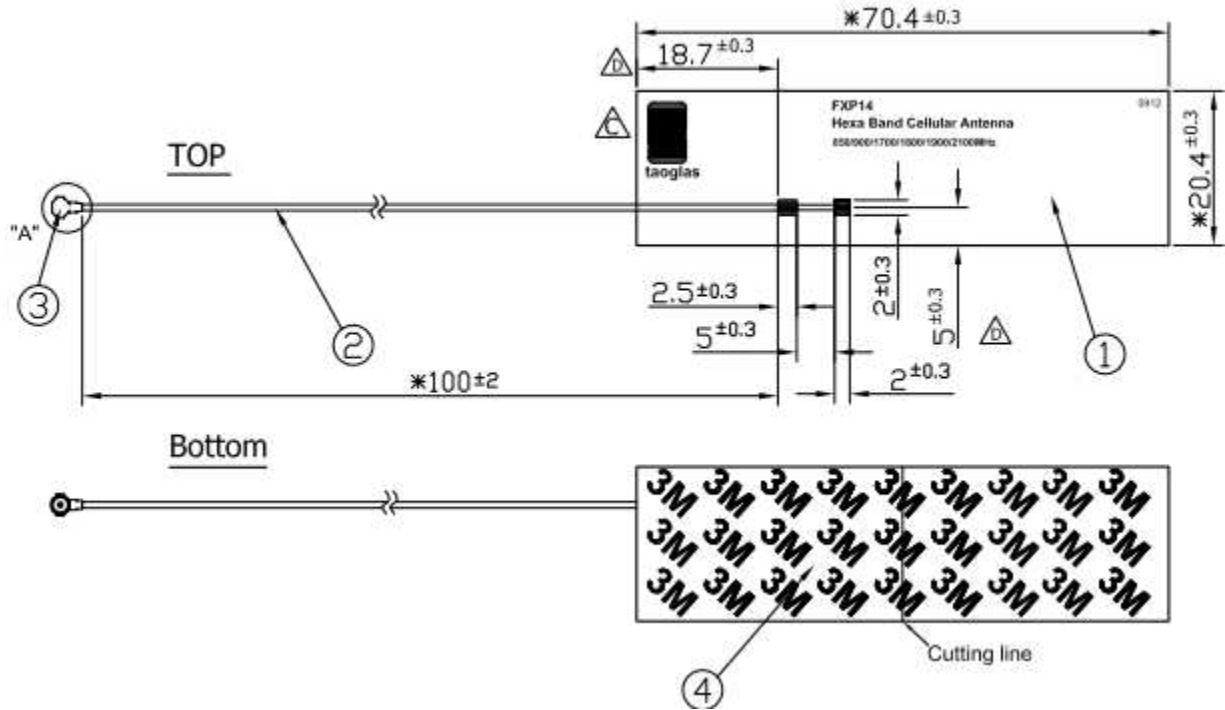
Mechanical Drawing for the FXP14 Antenna.
